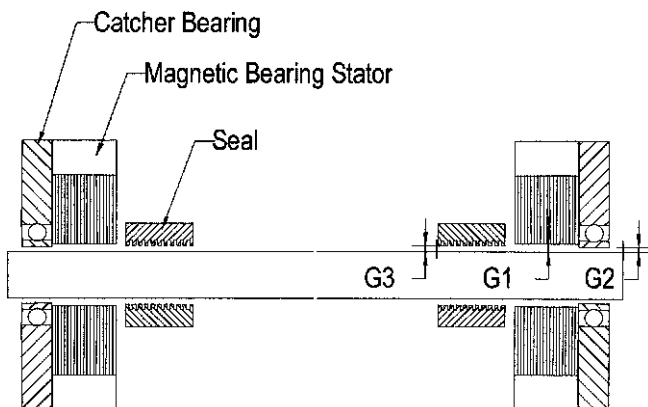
Clearance arrangement: Seal ring clearance G3 is greater than catcher-bearing clearance G2, but is less than magnetic-bearing clearance G1.
